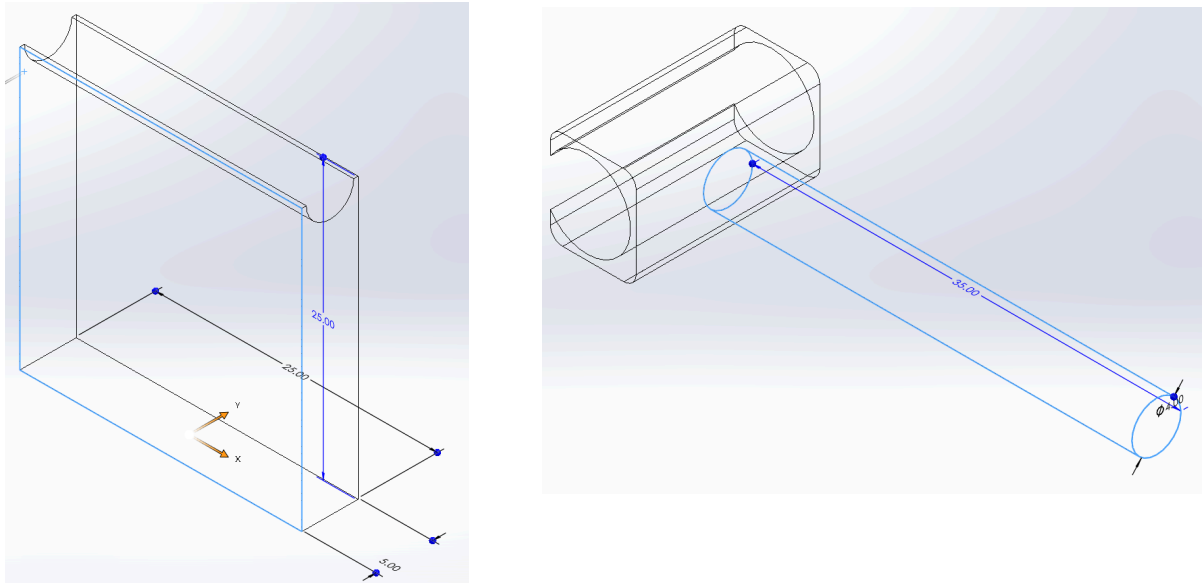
Linkage 3: Laser Pointer Mount (Left) & Laser Pointer Shaft (Right)
